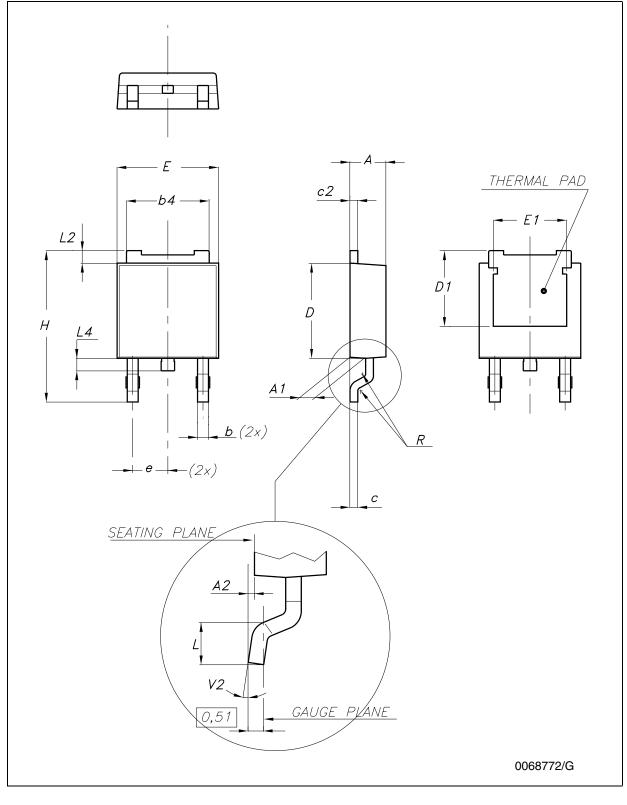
Drawing dimension DPAK (type Fujitsu-subcon.)
